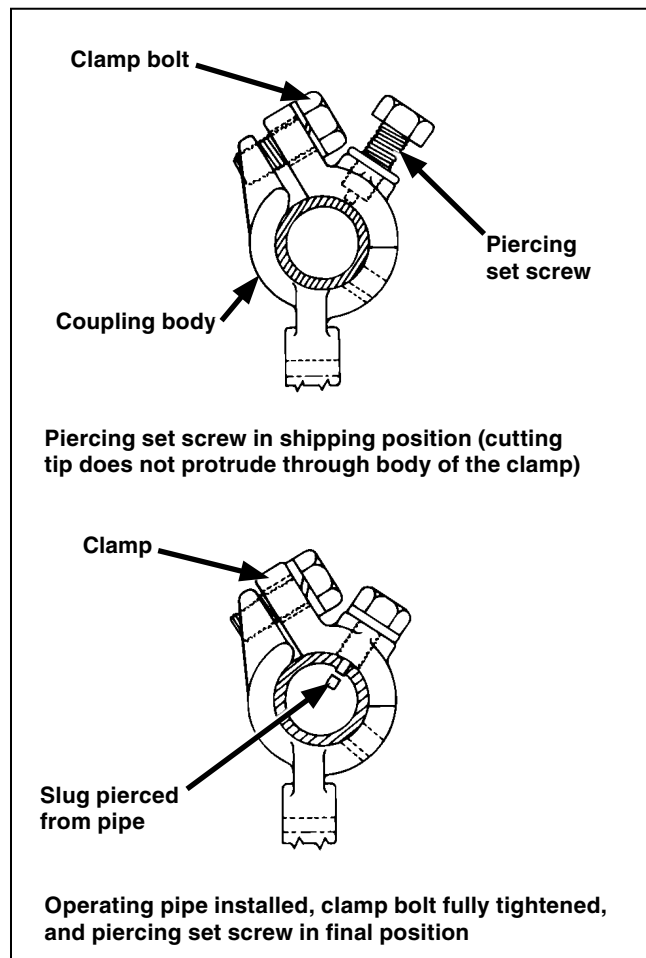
Install the pipe couplings. Back the piercing set screws out of the body of the coupling before installation.
